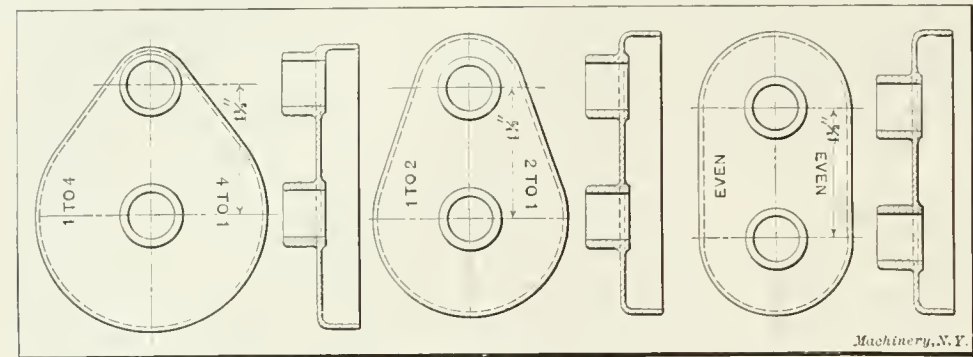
Gear Cases Hollow-milled in Device shown in Fig. 2
